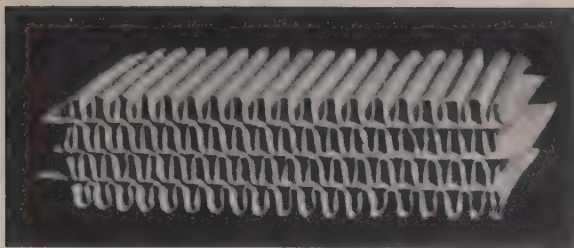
Experimental heat exchanger made for 0.006-in. corrugated aluminum sheet brazed to standard aluminum coated steel sheet.
